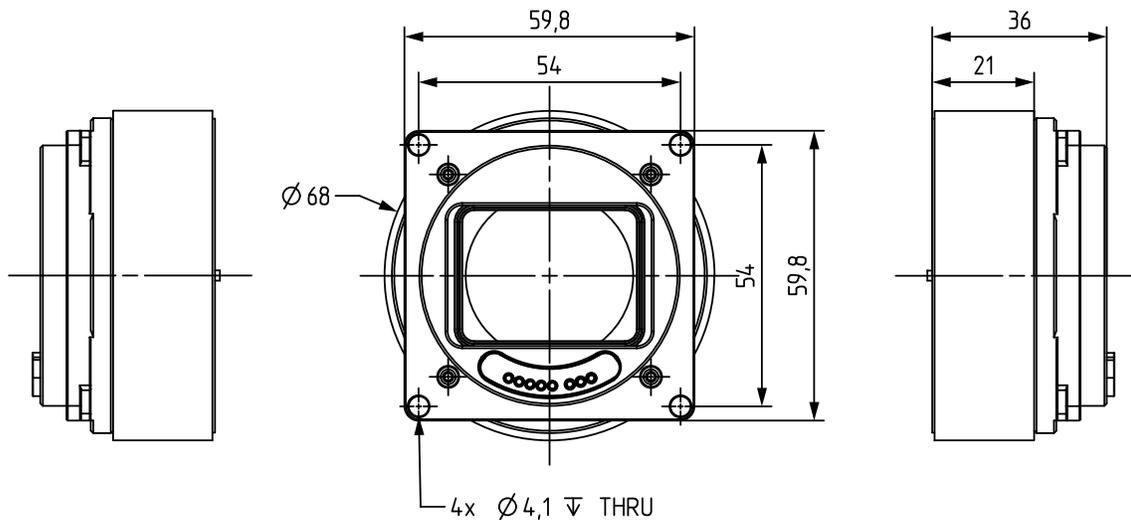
Dimensional drawing of MECH-60MM-EF-ADAPTER
